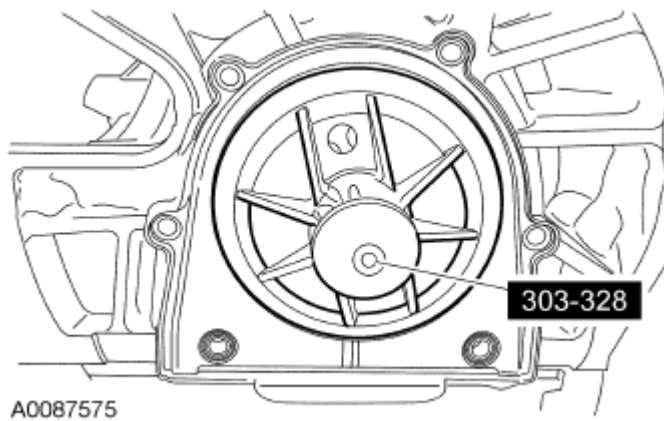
Identifying Crankshaft Rear Main Oil Seal Installer
